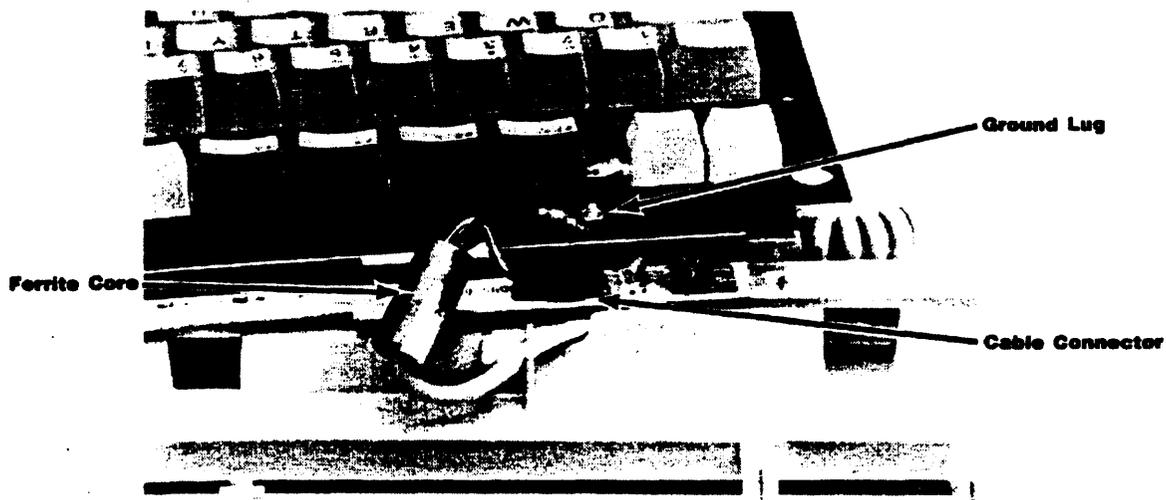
Keyboard Assembly—Cable Connector and Ground Lug
